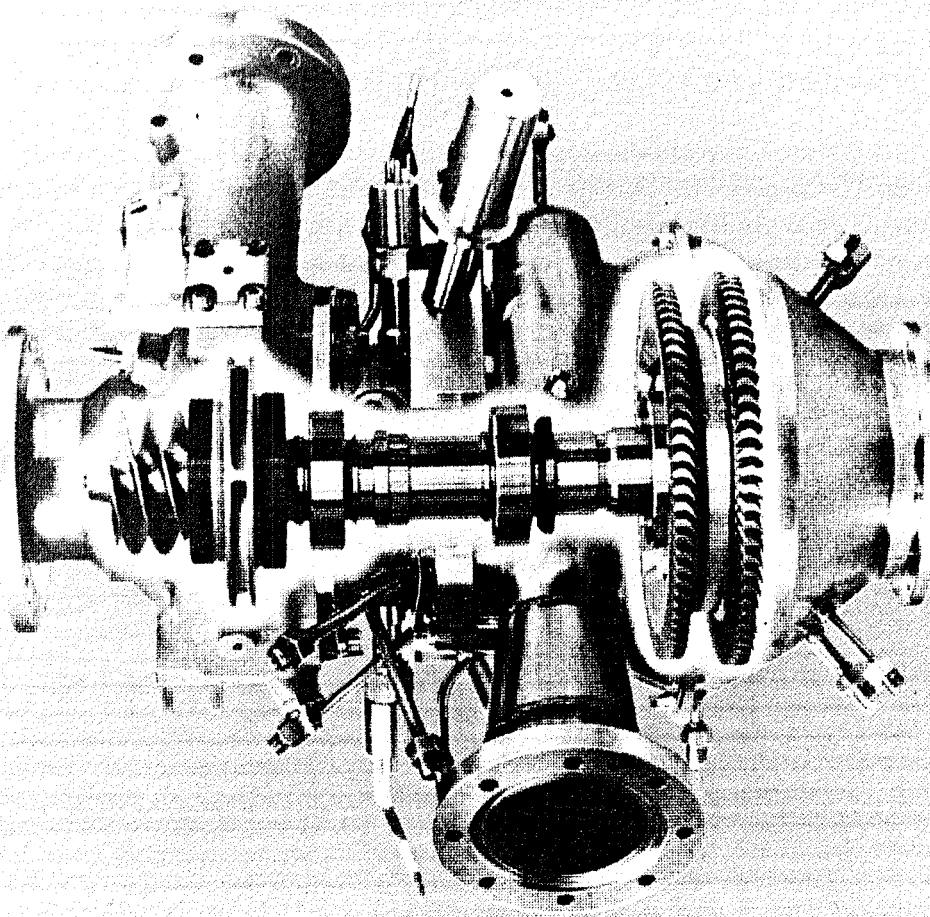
LE-8 Oxidizer Pump (Photo Courtesy NAL)
